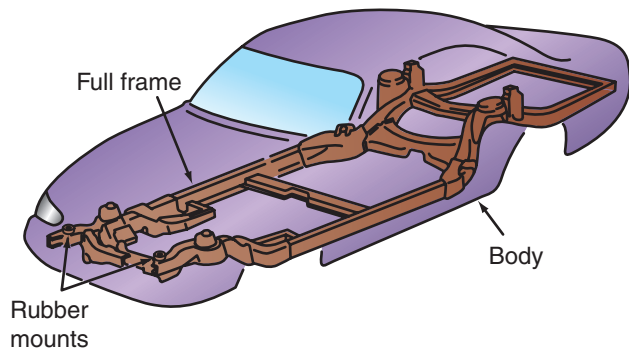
Illustration of a vehicle with body panels removed shows chassis construction. Study the part names.
